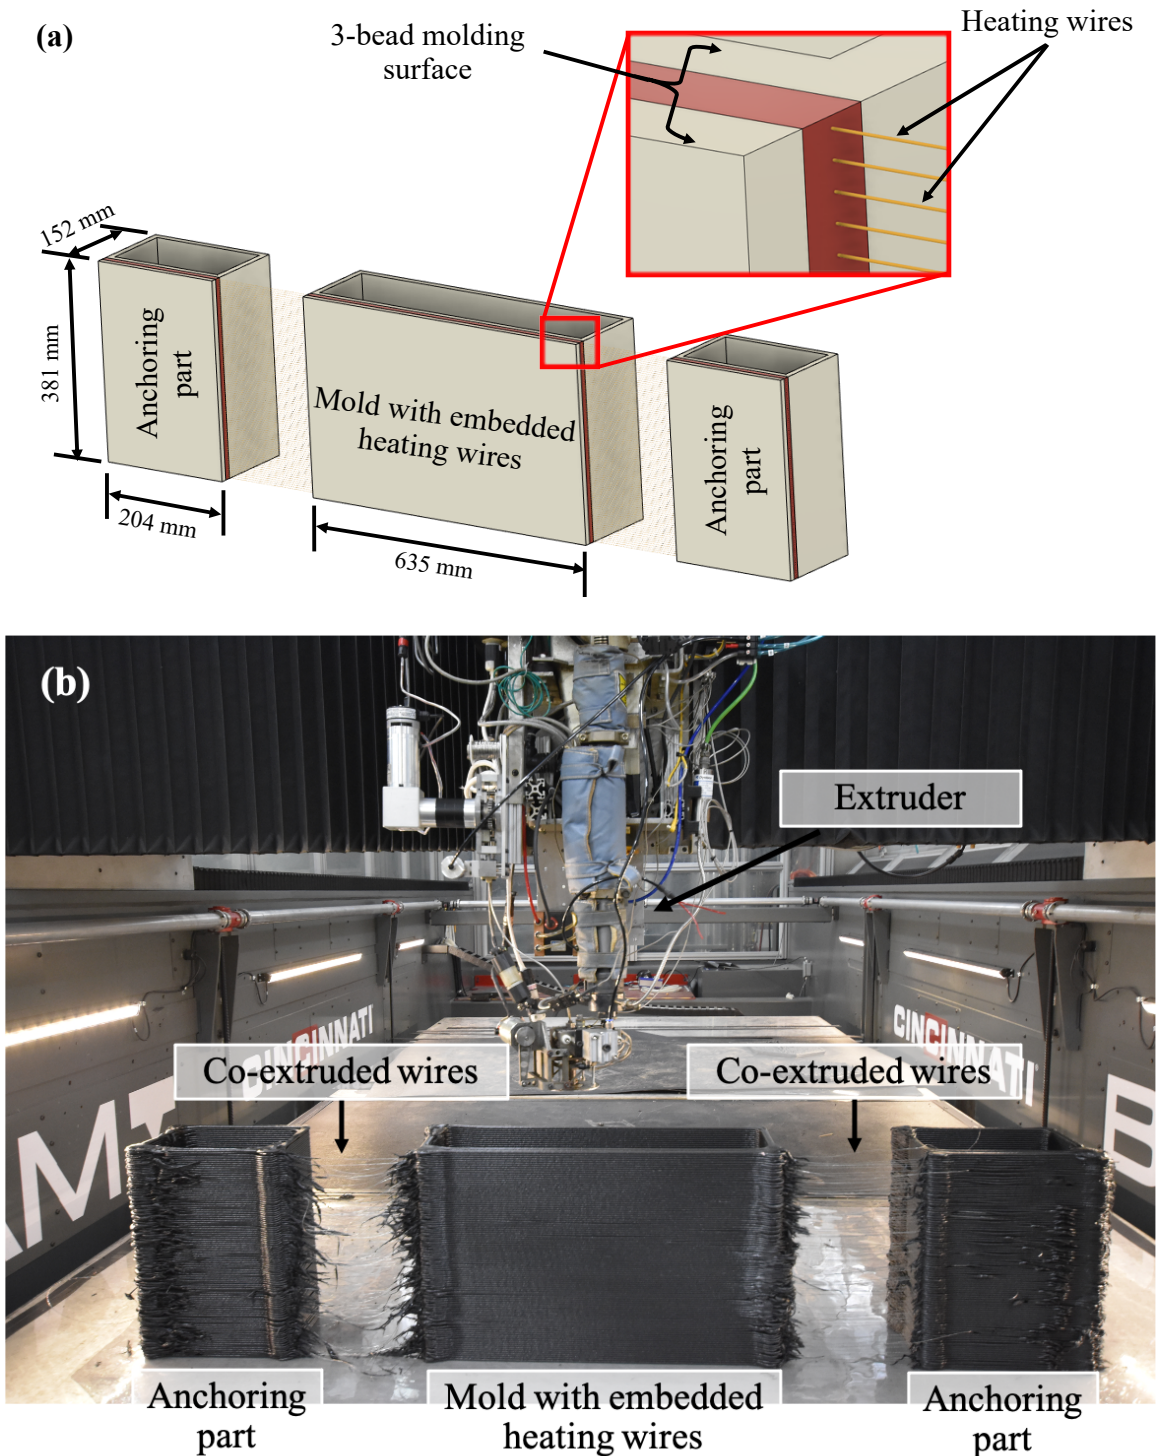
AM self-heated mold with embedded heating wire; (a) schematic for the mold and sacrificial anchoring parts dimensions, and (b) actual PC/CF composite mold with embedded wires during printing on the BAAM system.
